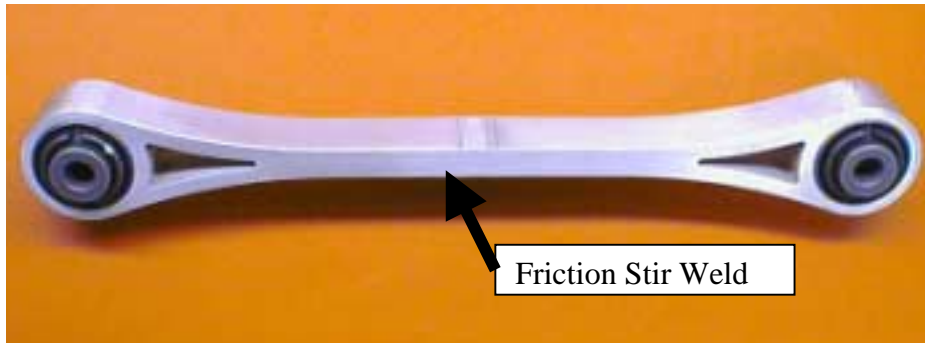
Automotive Link Arm Fabricated from Friction Stir Welded Extrusions
